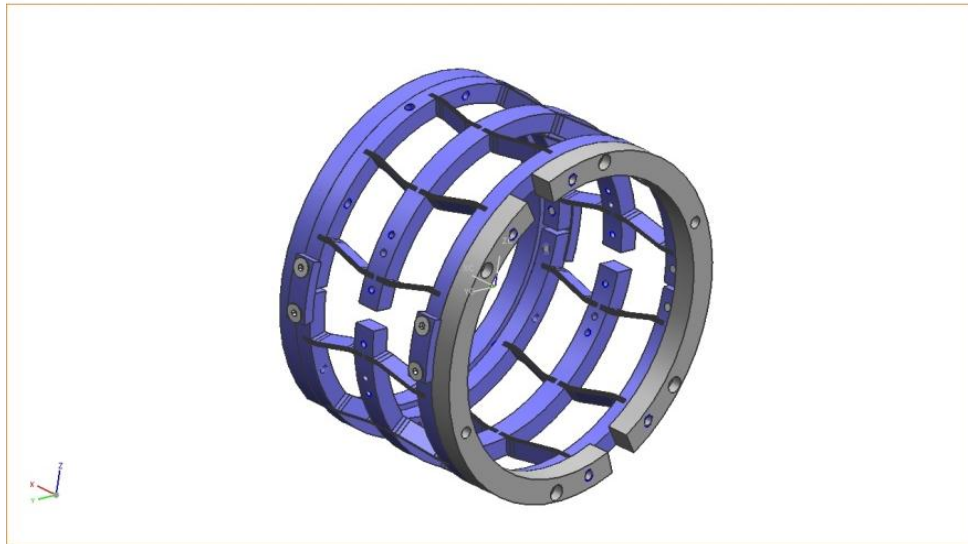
The additional adaptation rings, in grey, installed for the new design Blade Tuner
